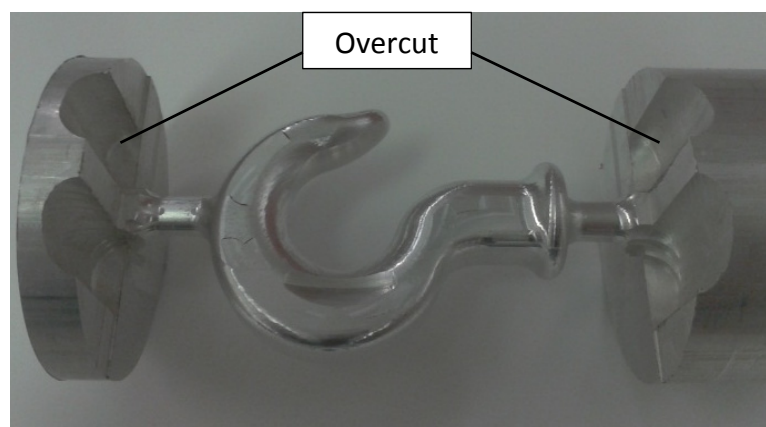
Cutting level problem that caused overcut to the workpiece
